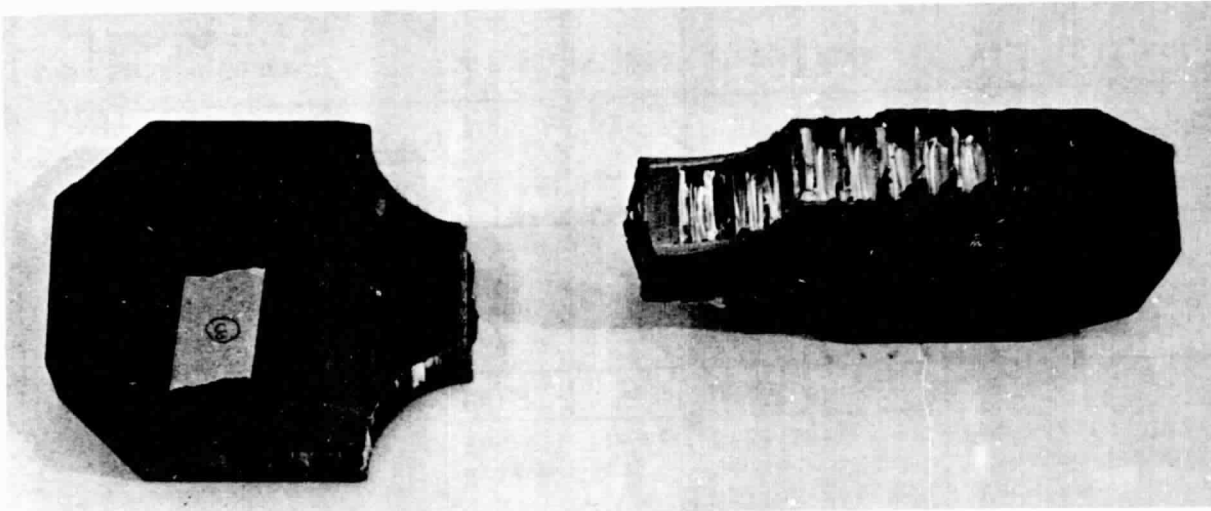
Inlet Manufacturing Joint: Test No. 3 Failure.
